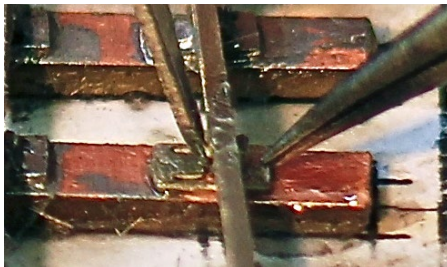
The check rail is in position, its bottom fluxed ready to be soldered, held to gauge by a roller gauge in the middle and flange gauges (0.5mm thick pieces of shim) at each end.
